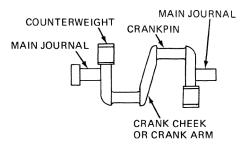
Nomenclature for a twin-row radial crankshaft.
